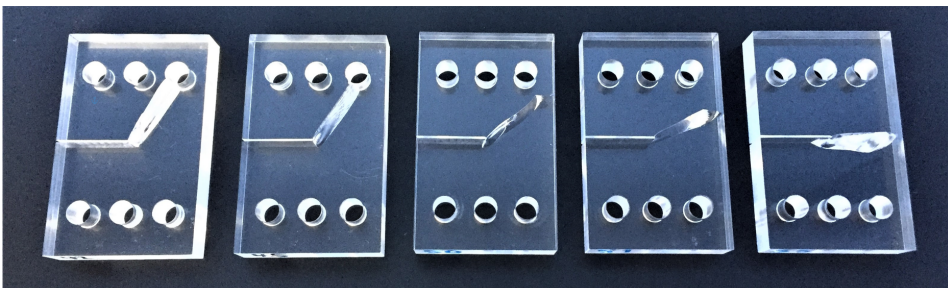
Specimen in plane crack paths for all C-fixture combinations, of J-fixture position  $\beta = 22.5^\circ$ .
